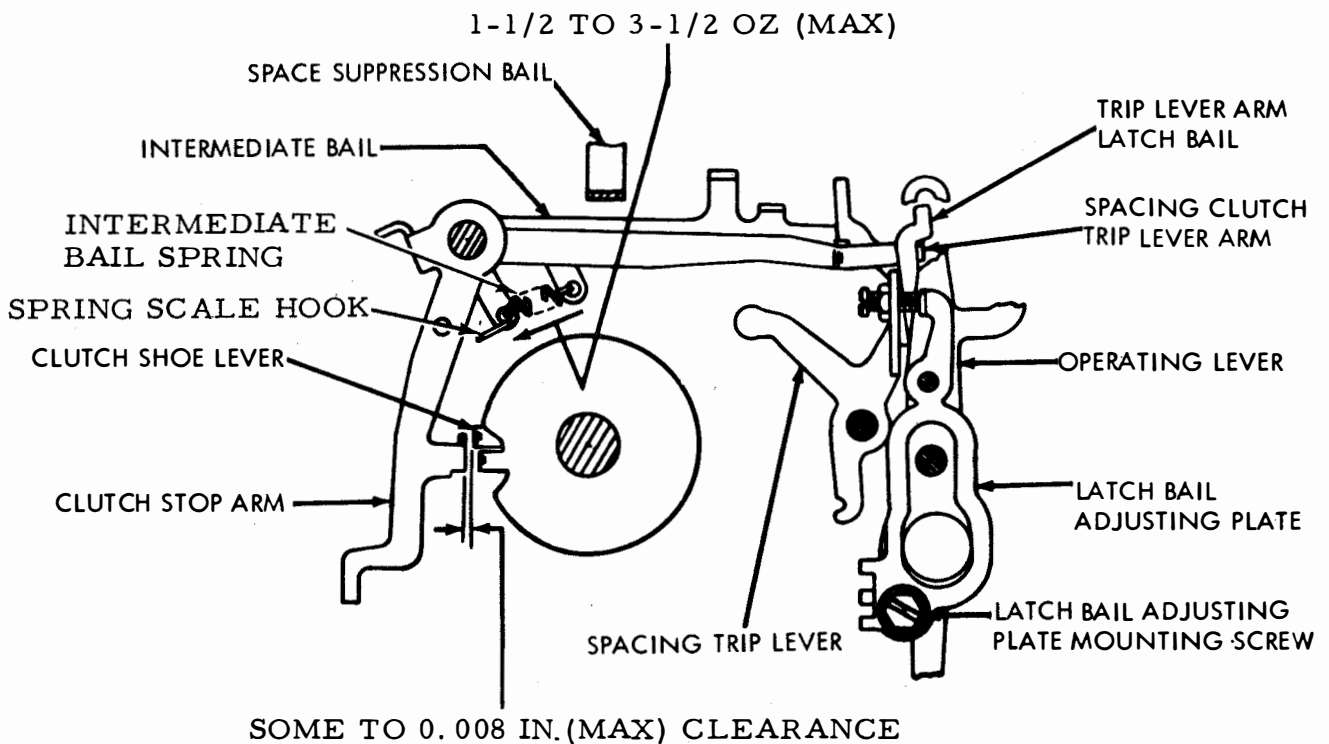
Intermediate Bail Spring and Latch Bail Adjusting Plate, Left Side View
